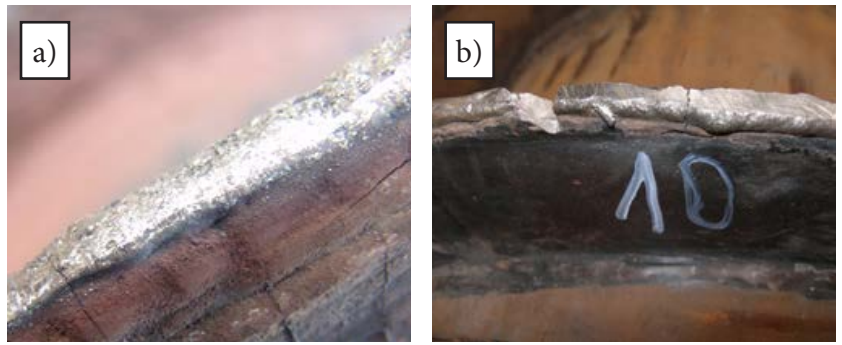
Partly (a) and fully torn off (b) layer surfaced using self-shielded flux-cored wire (process 114), cast iron of group Fe15, on a screw coil (f 478 mm) of a screw conveyor
